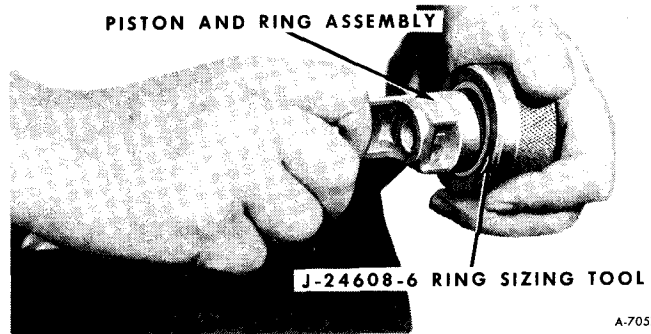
Turning Piston and Ring Assembly into Sizing Tool
